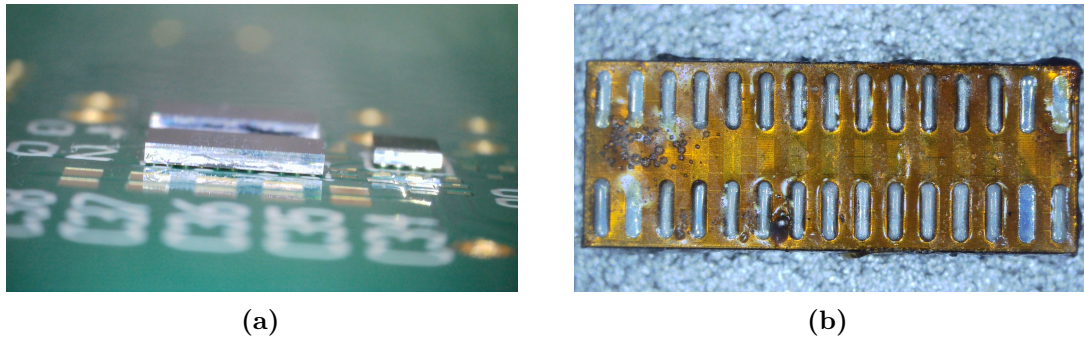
Assembled EPC2021 devices, pictured with a portable electronic microscope, with discernible solder bumps that are not bridging (a), and the EPC2021 after removal, which shows paste residue on the left side of the transistor (b).
